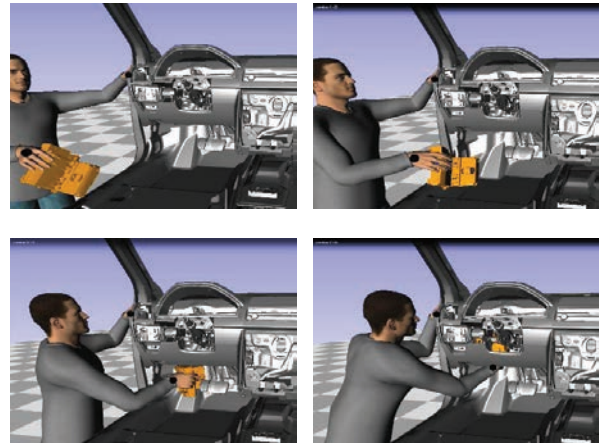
Four frames of the assembly of the electronic device. Courtesy Volvo Cars.
